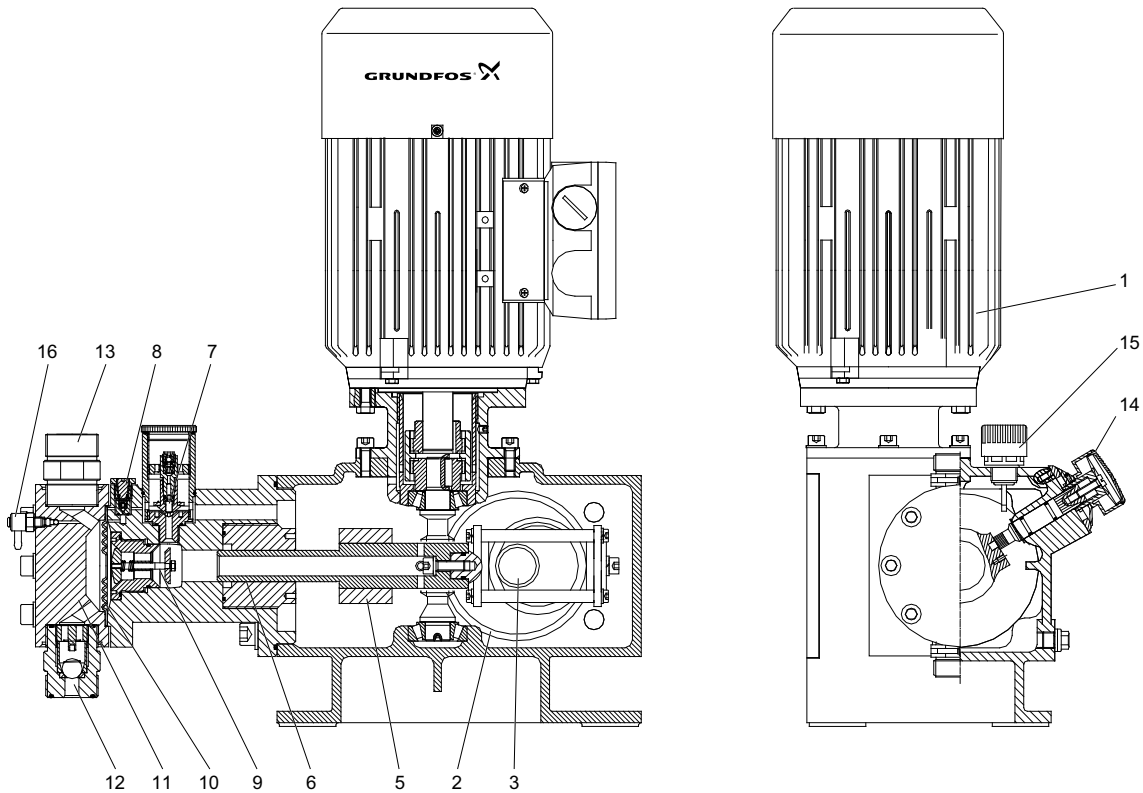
Sectional drawing, DMH models 285, 286, 287
